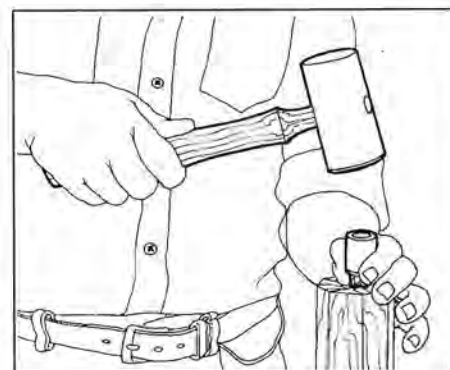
With a mallet, seat the drive center in one end of the workpiece and the cup center in the other.
